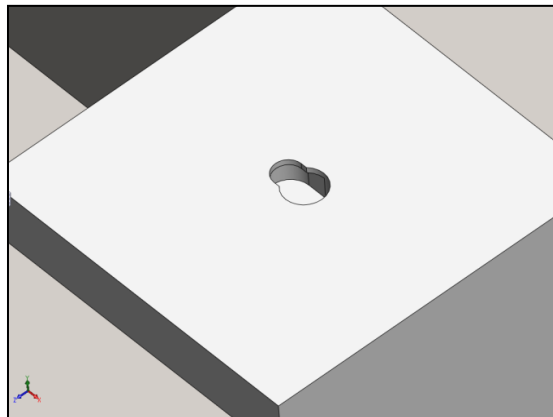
Next a T-slot bit would be used to cut out the lips of the slot.
